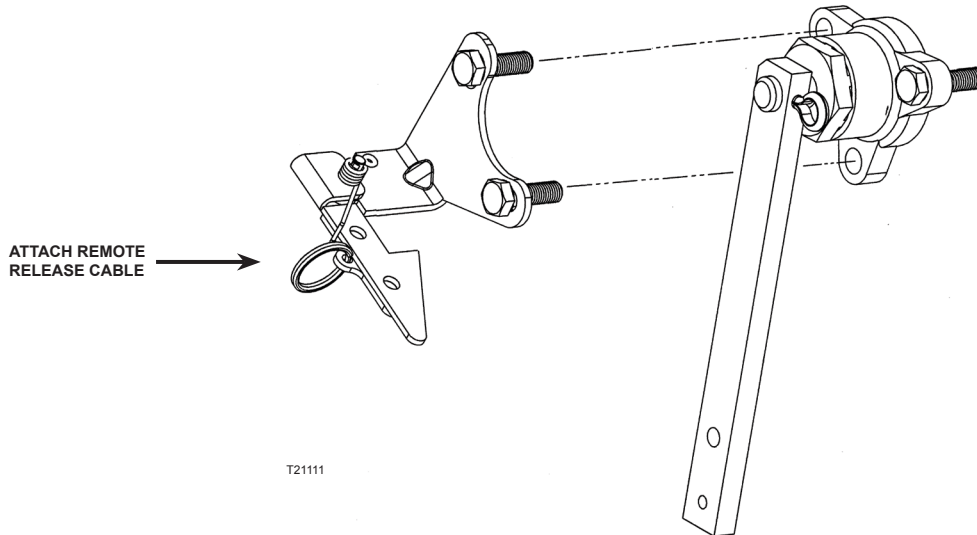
Type P340 Installed on C401, C402, C407, C421, and C427
